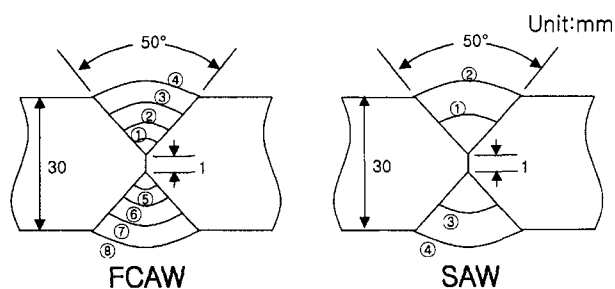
Schematic diagram of deposited weld panel.
